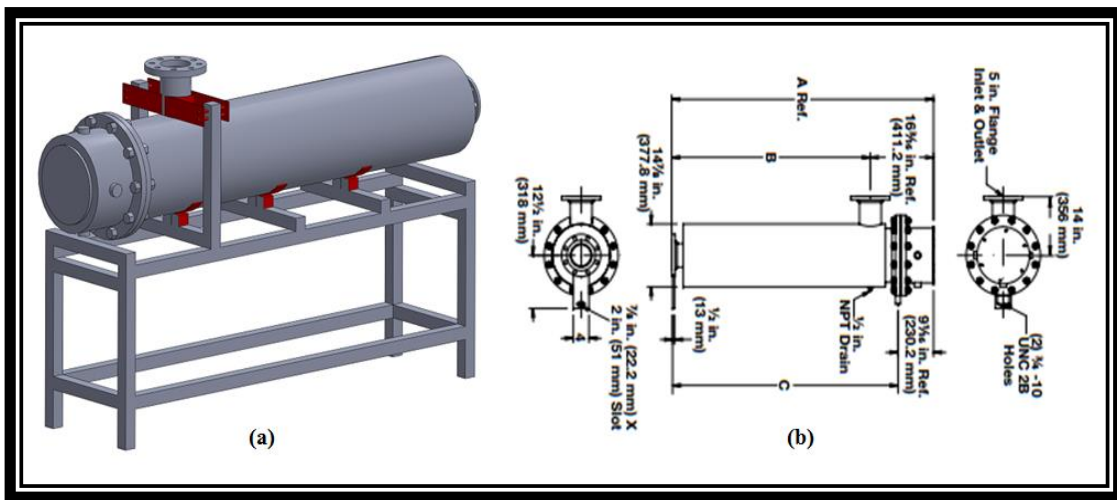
Heater (a) model with stand and (b) manufacturer specific drawing
